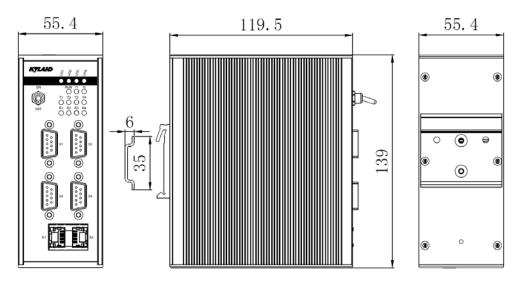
Dimensions for DIN Rail Mounting (Unit: mm)
